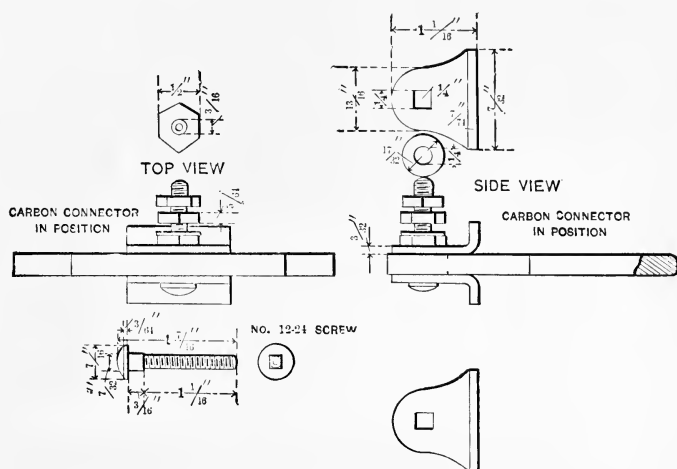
Details of Clamp for "Standard" Fuller Cell.
